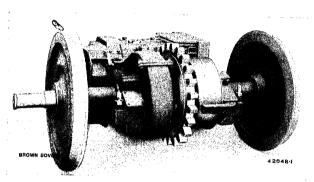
Wheel set with built-in driving motor and driving gear.
